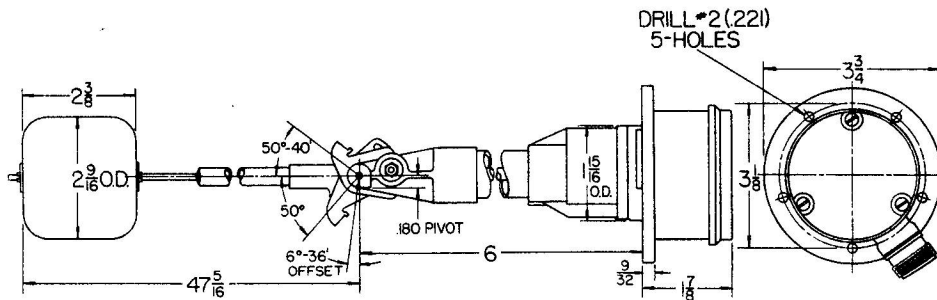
(Sheet 4 of 9 Sheets). General Dimensions
